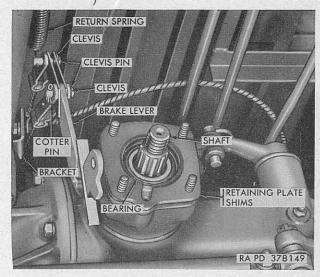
Shaft bearing and adjusting shims after removal of brake.
